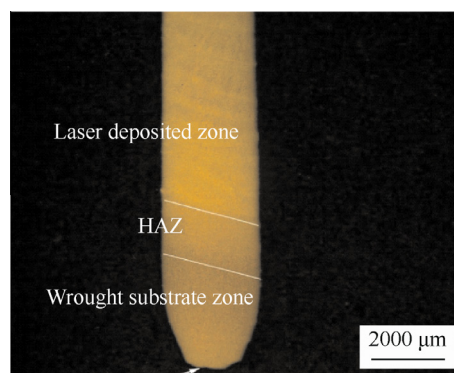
Cross-sectional morphology of a tensile specimen of the hybrid fabricated 1Cr12Ni2WMoVNb steel sample (fracture surface is indicated by the white arrow).
